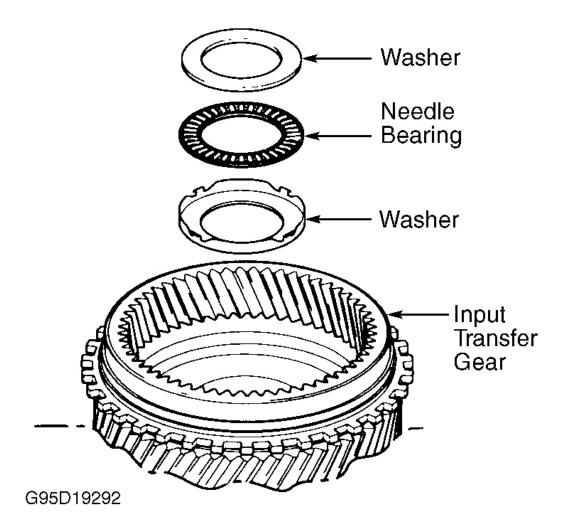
Installing Axial Needle Bearing To Input Transfer Gear Courtesy of VOLKSWAGEN UNITED STATES, INC.
